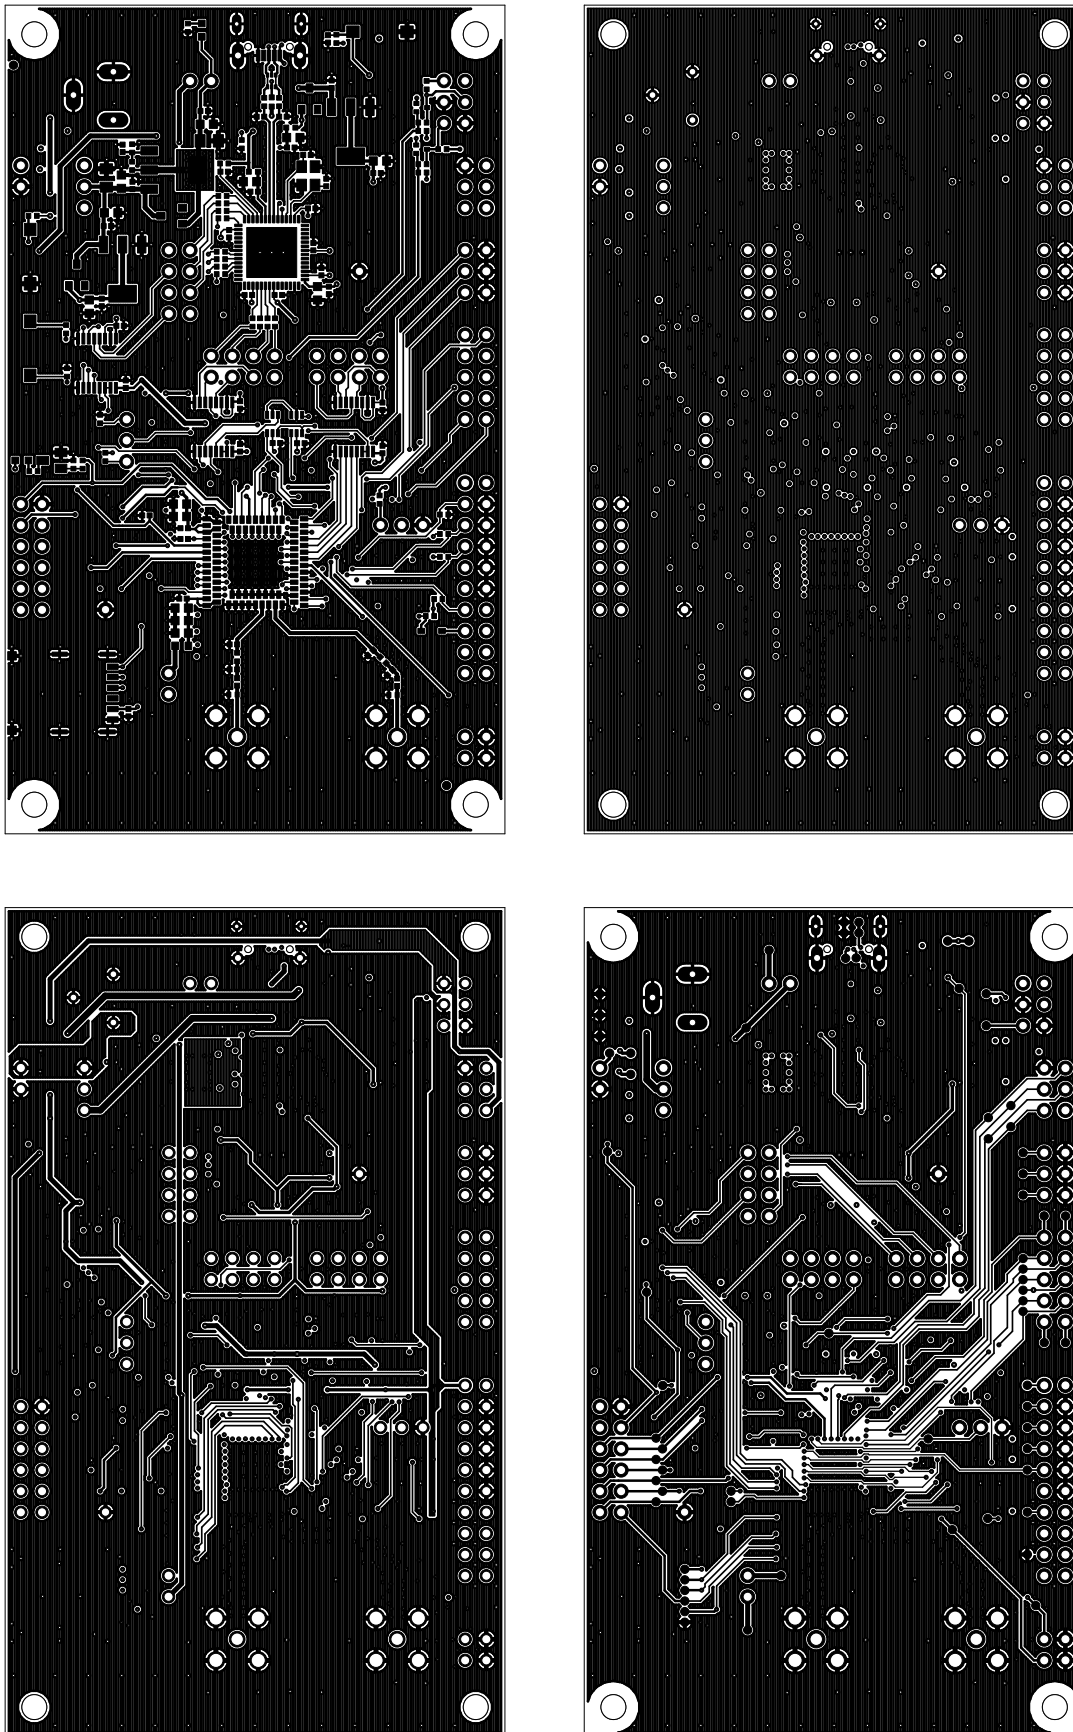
Top layer (upper left), second layer (upper right), third layer (bottom left), fourth layer (bottom right)
